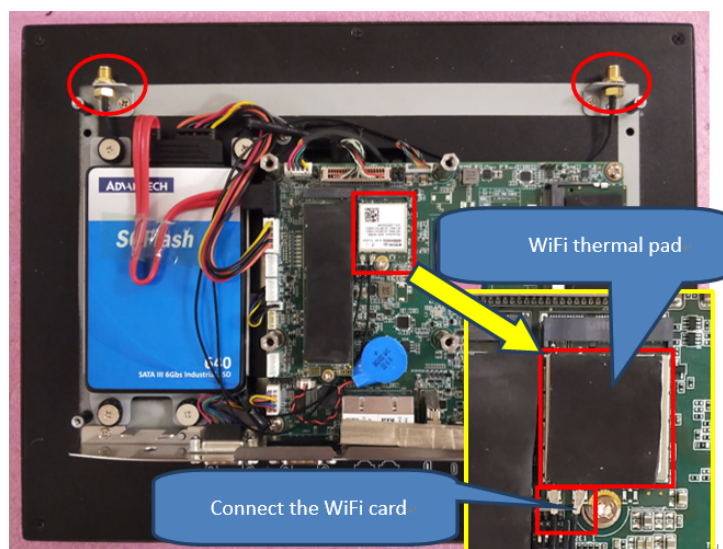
Assemble the Wi-Fi Card and Thermal Pad
